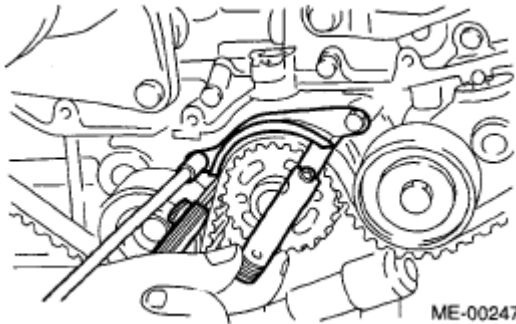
Tightening Bolts Mounting Timing Belt Guide
